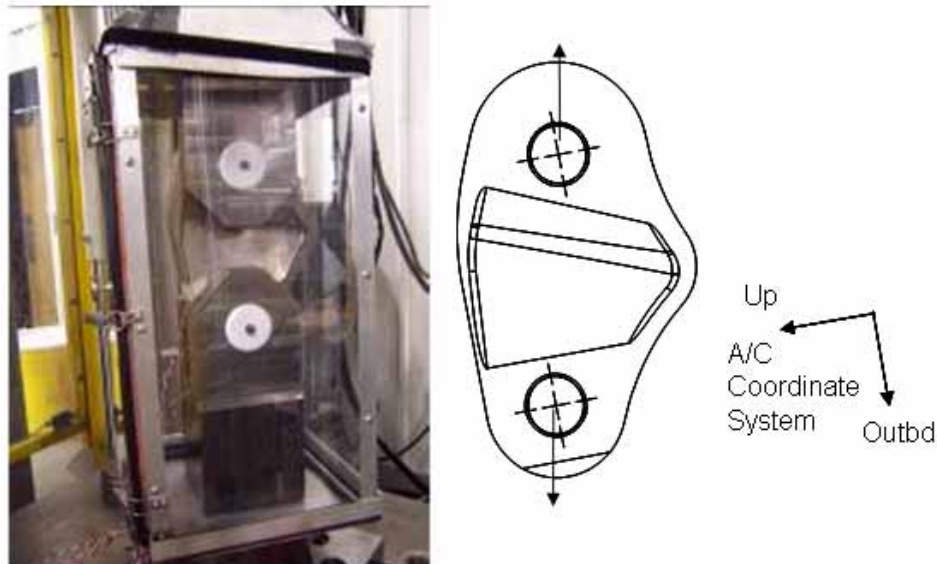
Test specimen aligned in test frame, photograph on the left is picture of test setup.
